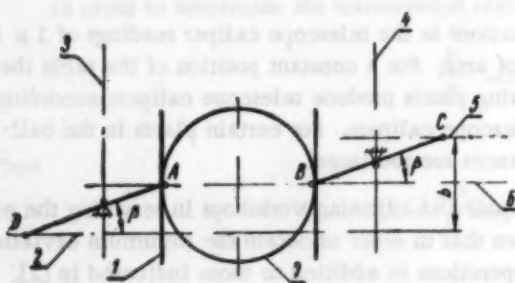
1) Gauge block; 2) tail spindle axis; 3 and 4) snap-gauge rotation axis; 5) telescope caliper axis; 6) measurement axis; 7) ring.
